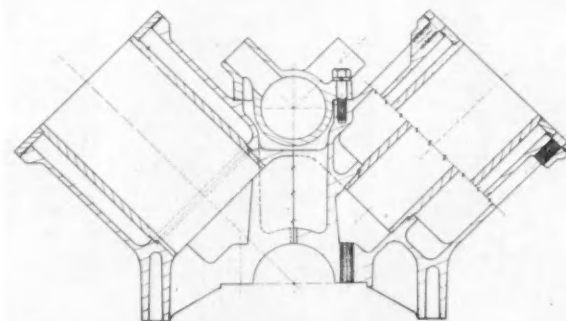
V-8 engine block designed for aluminum die casting with wet sleeves in gray iron.
